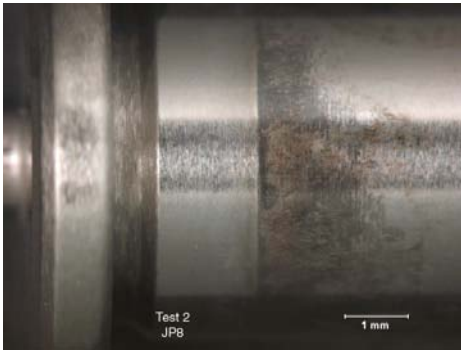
Upper Piston, Injector Hydraulic Coupler, JP-8
